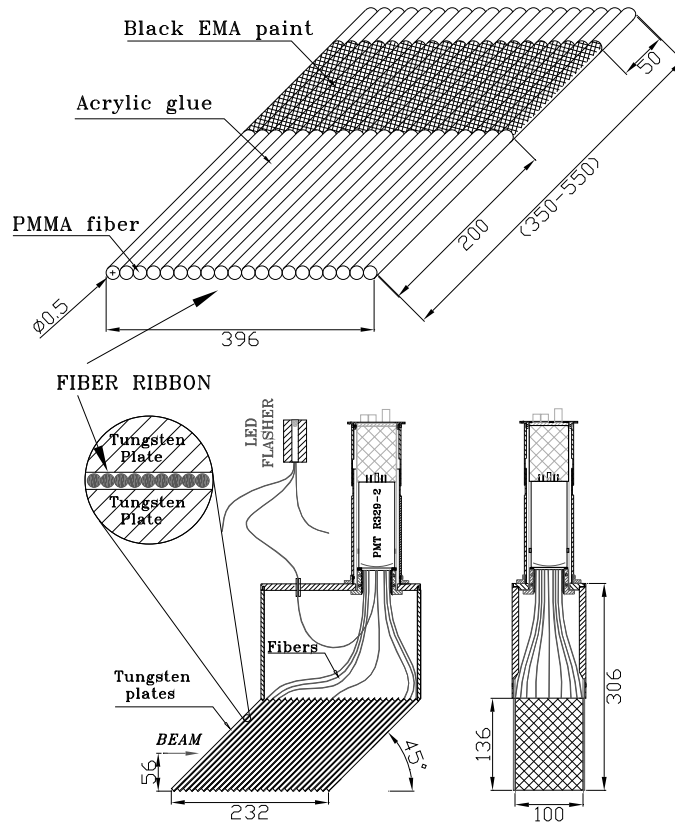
Construction design of a ZDC module. Dimensions shown are in millimeters [72].
